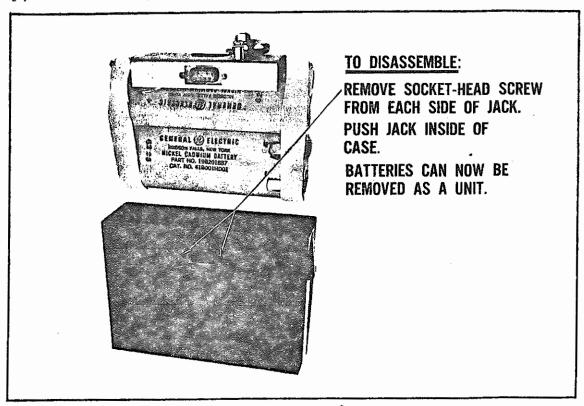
Disassembly of Power Supply Model 4EP32A10
